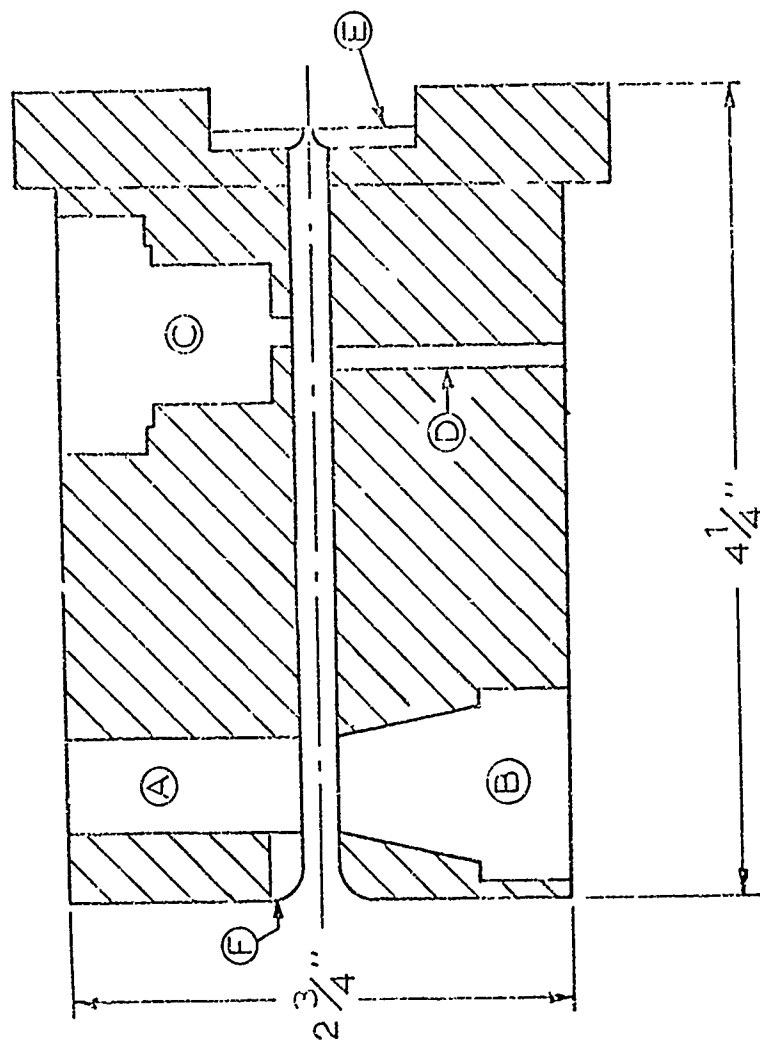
CROSS-SECTIONAL VIEW OF THE TEST SECTION.
